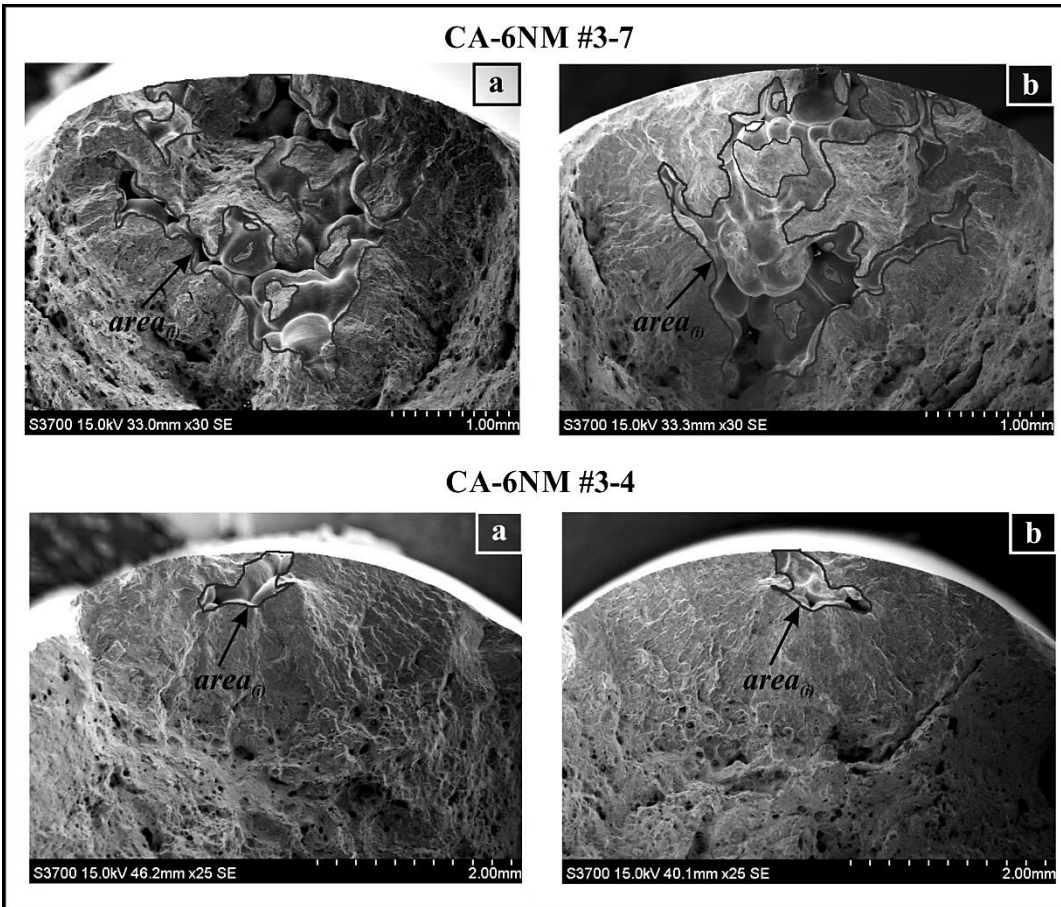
(a), (b) Area measurement of macro-shrinkage porosities (i.e., the origins of fatigue failure) on both broken halves of tested samples
